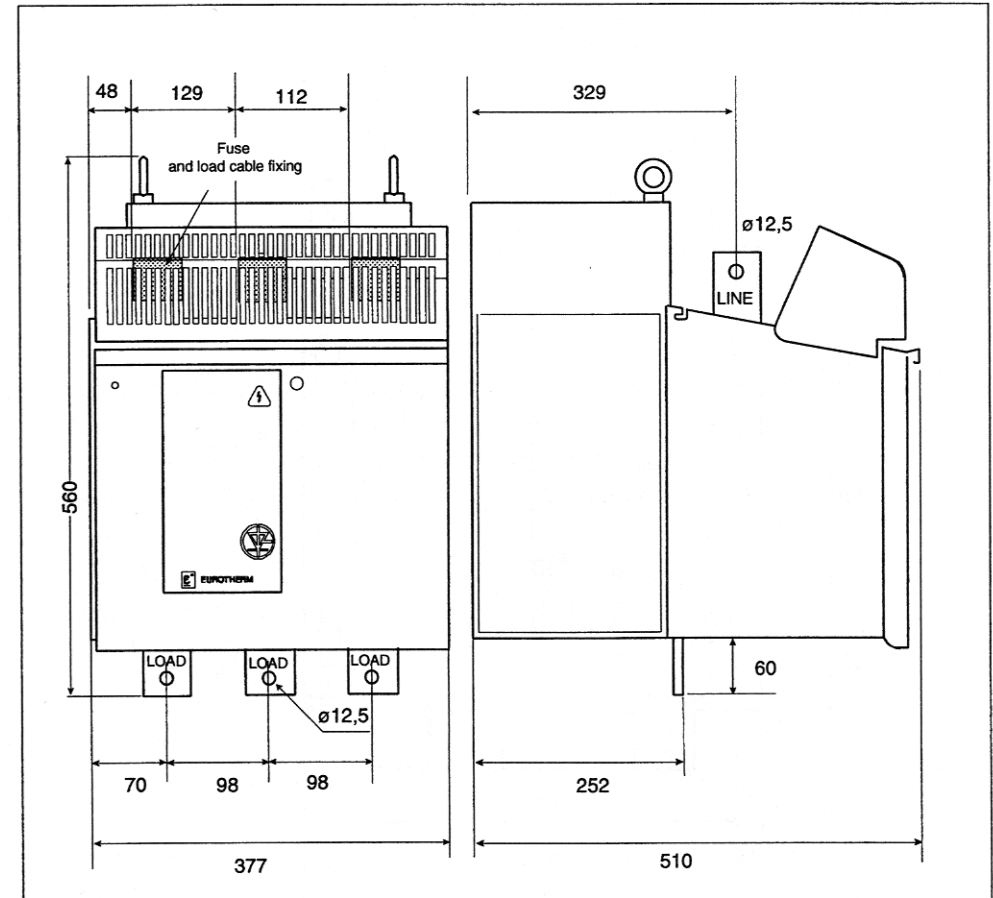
Overall dimensions (mm) of the TC3001 / 700A-1000 A nominal series thyristor units and power connection details
